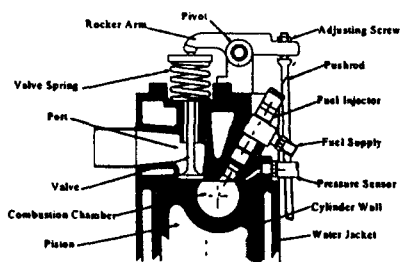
Sectional view of the combustion chamber of the diesel engine
